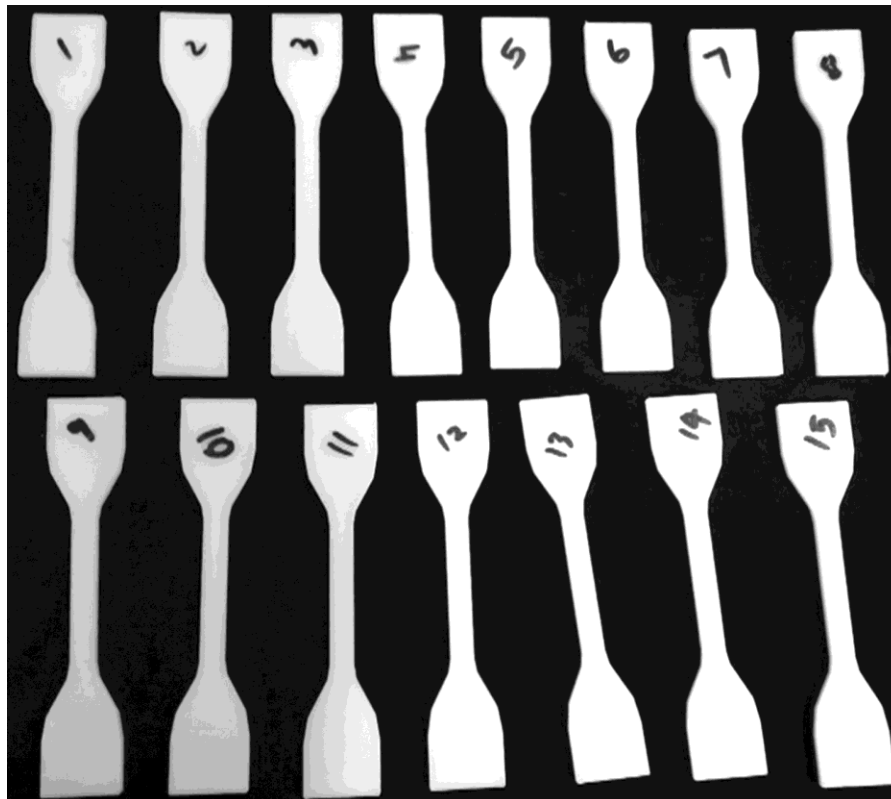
Specimens fabricated as per ASTM D638 type IV standard.
